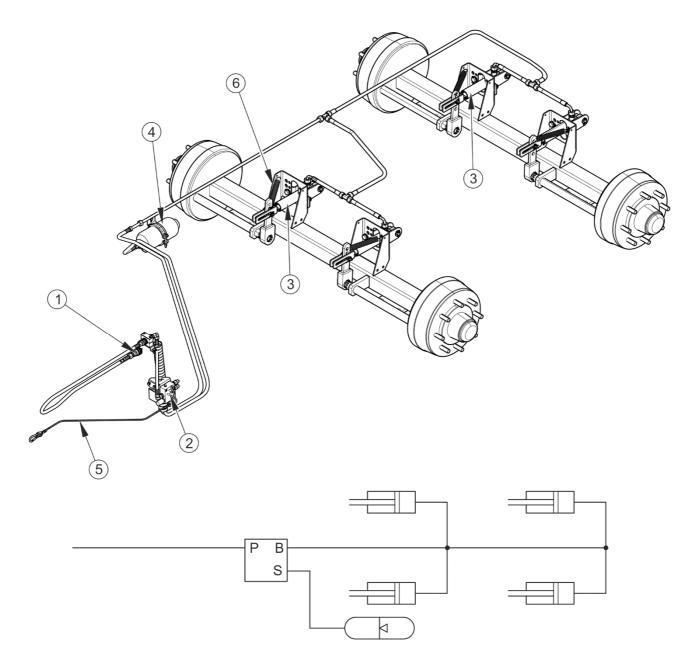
Design and diagram of hydraulic braking system with mechanical protection
